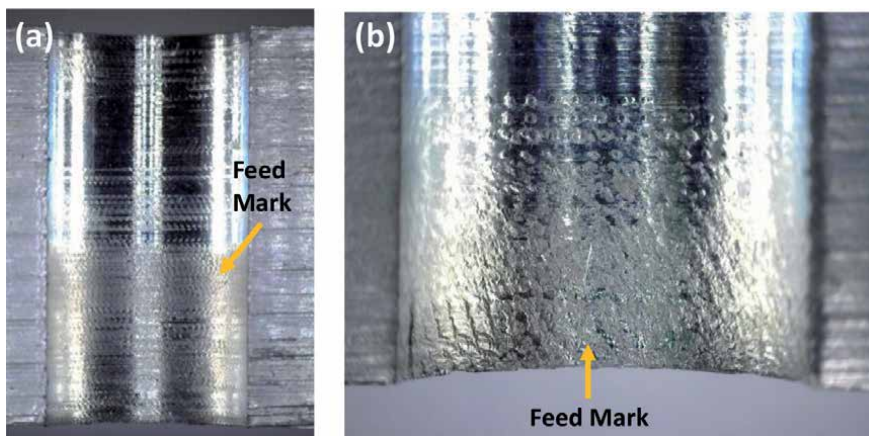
Feed mark on the machined surface of Al 7075-T6 (heat-treated) caused by drilling at a high feed rate of 0.1 mm/rev; (a) the surface of the drilled hole that was sectioned into a half (b) the hole exit.
